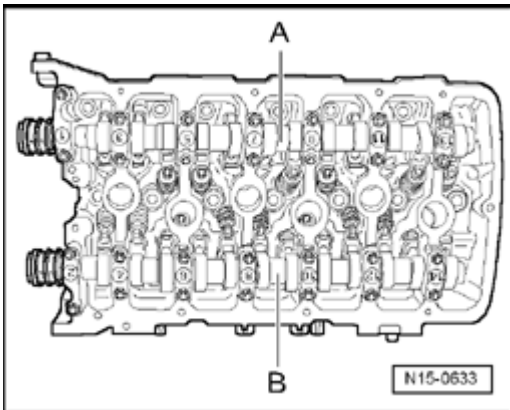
Intake/Exhaust Camshaft - Cylinder Bank 1 (Right)
